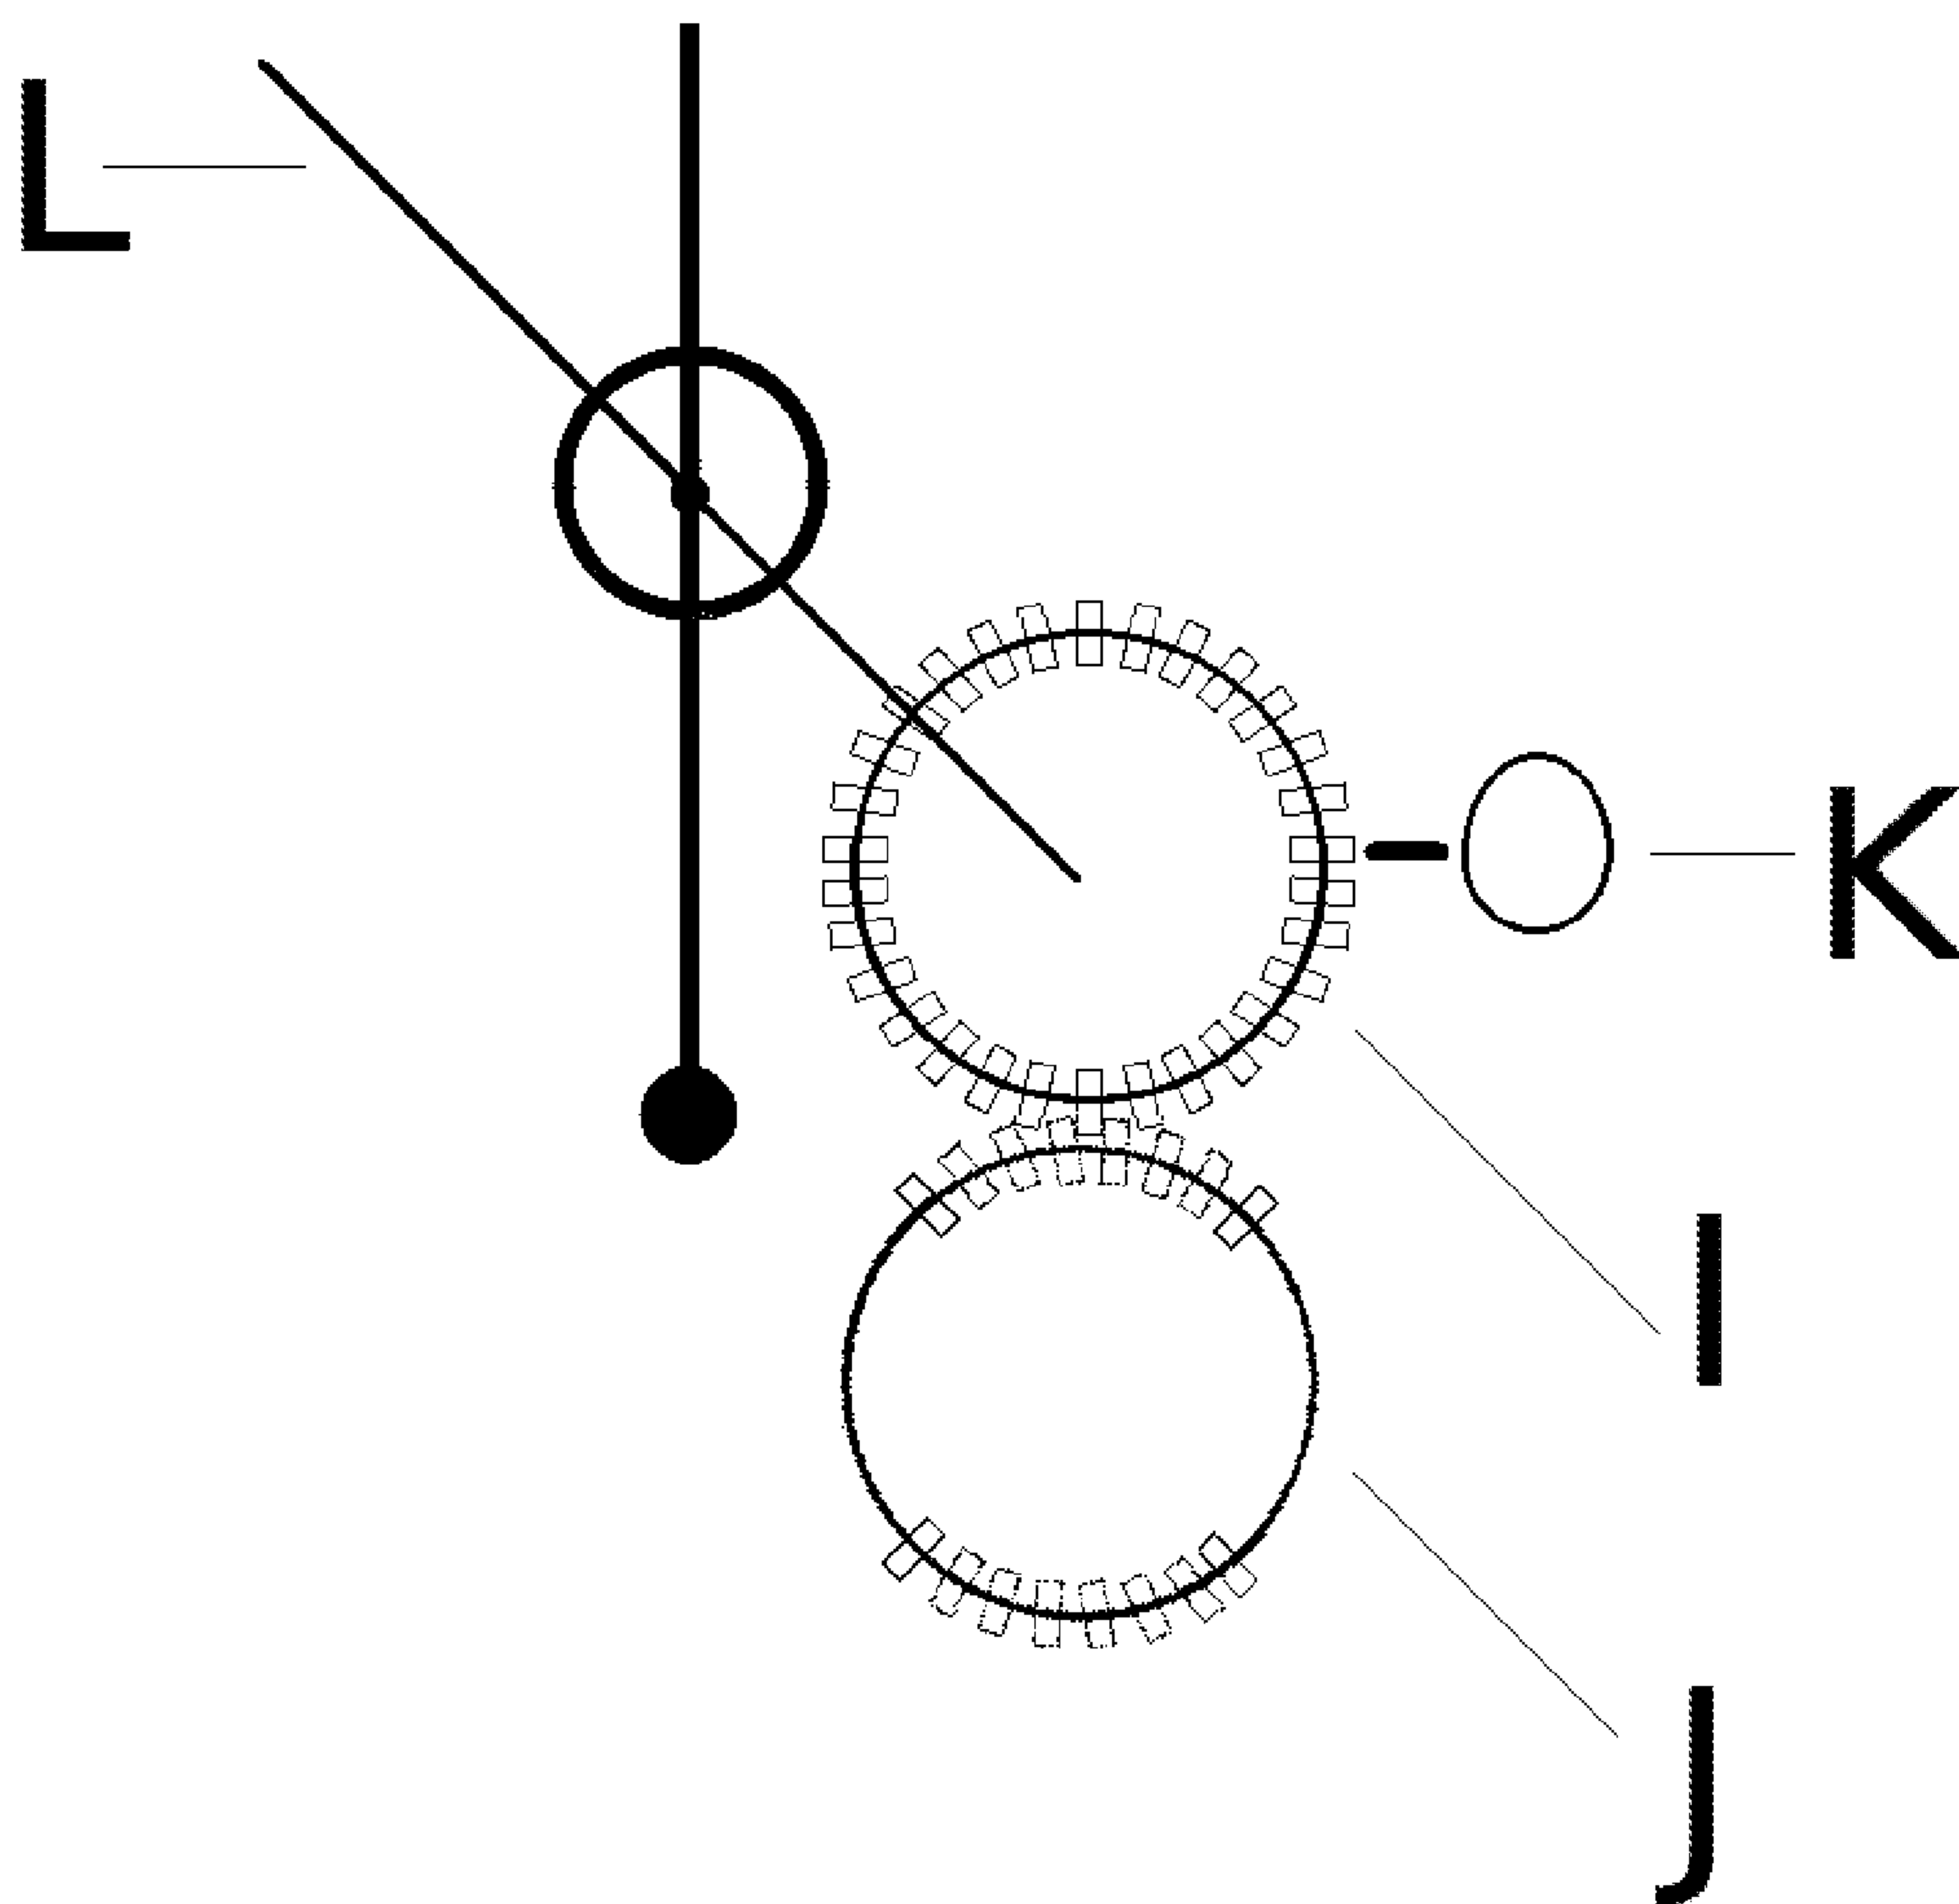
The gear system to operate the ideal-gas temperature adjusting piston. The mechanism is identical to the condensing Stirling Cycle engine; substitute Part *I* for *M*, Part *J* for *N*, Part *K* for *O*, and Part *L* for *P*. This piston is to move during this 90° range, so the mutilated gear has teeth, and the cam system is depressed allowing the gear to freely spin.
